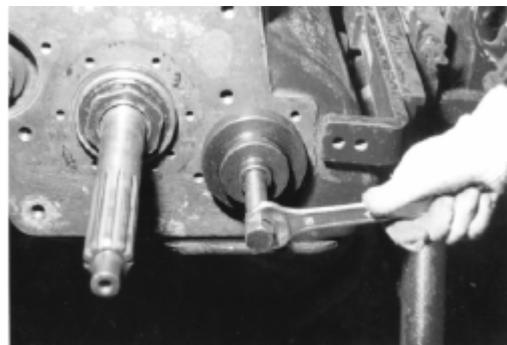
Remove The Front Bearing of Countershaft of Primary Transmission by Using Extractor
